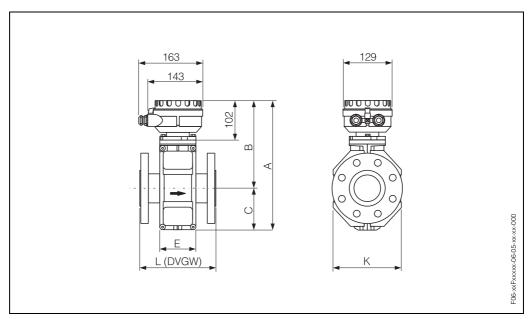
Dimensions Promag W / DN \leq 300 (remote version) Dimensions wall-mounted housing \rightarrow see Page 122
